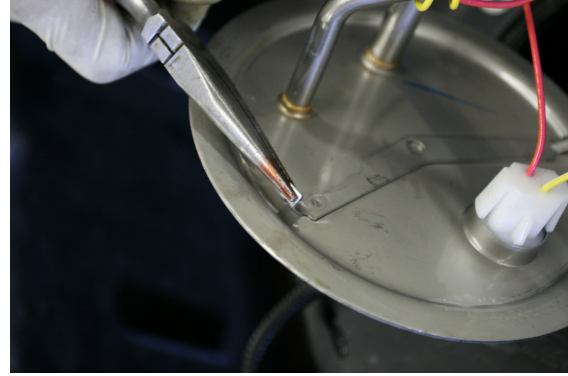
Remove the sending unit from the original equipment tank by rotating the hold-down ring counter clockwise.
